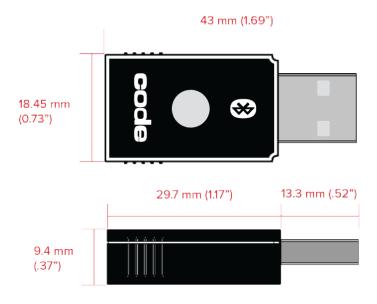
b CRA-BTDG27 Bluetooth Dongle Dimensions
